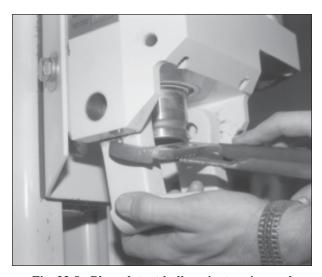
Place detent ball against spring and squeeze into latch.
